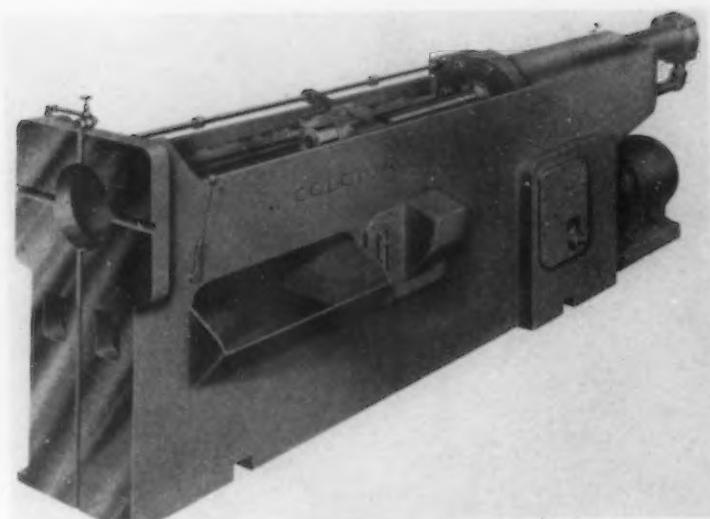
Universal broaching machine designed for adaptation to almost every type of broaching operation.
